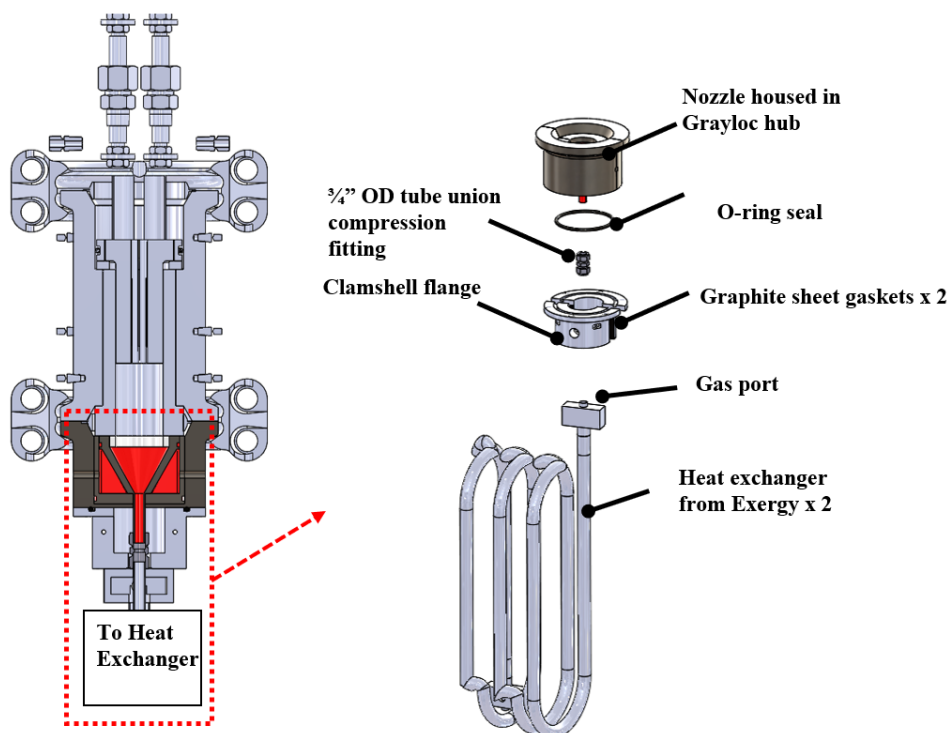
Design 2 of the joint connection of the original nozzle to the heat exchanger
